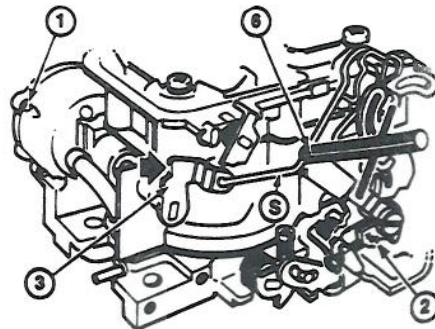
Choke coil lever adjustment w/single tang lever. 2SE & E2SE carburetors
